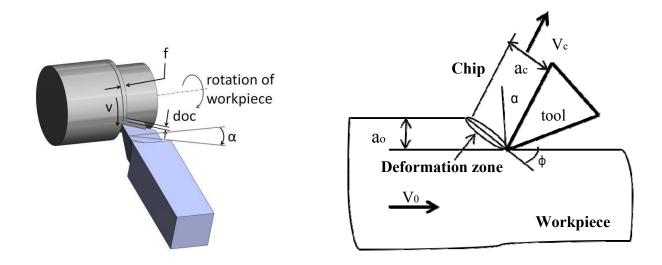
(a) Schematic of lathe machining and various parameters associated with it. (b) Geometry of the orthogonal machining process during single tool machining.
